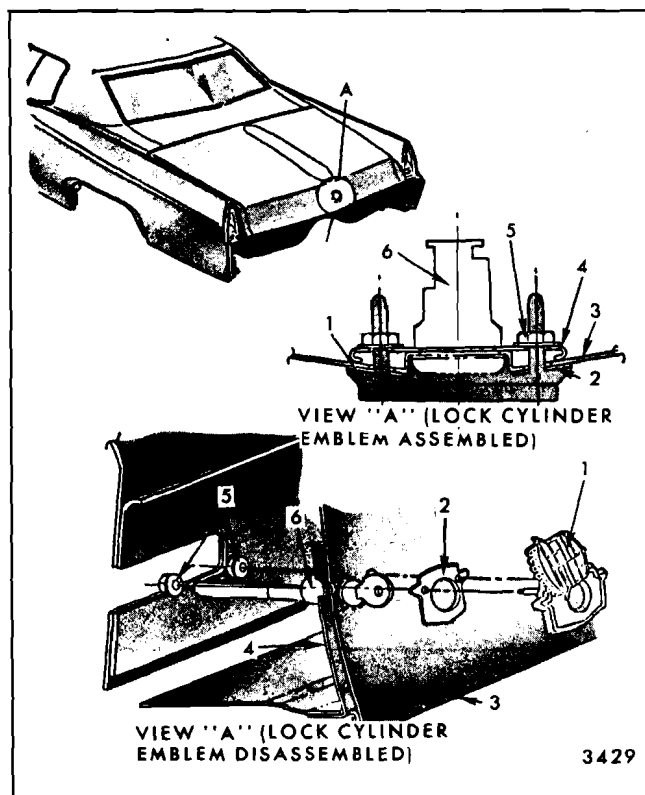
Lock Cylinder Removal - Cadillac "C and E" Styles
